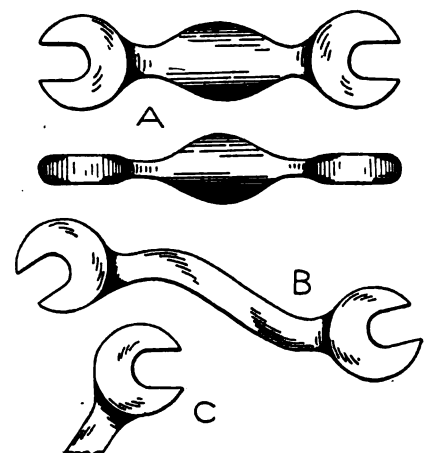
METHOD OF MAKING WRENCHES FOR LOCOMOTIVE WORK.
